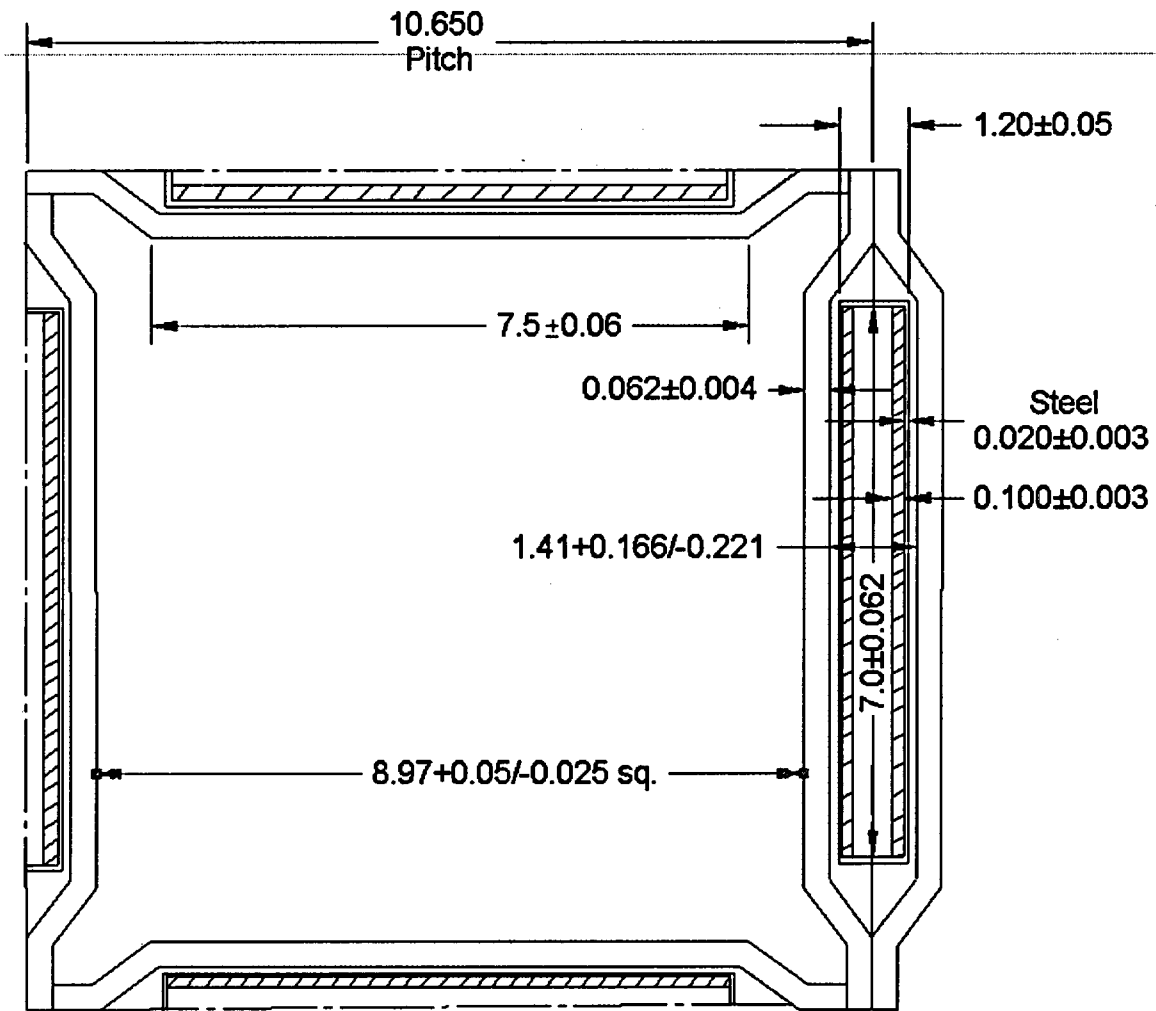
Sketch of Region 3 Racks, Detailing Important Dimensions and Tolerances. (NOT TO SCALE, all dimensions in inches)^[27]
